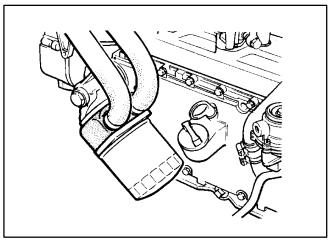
OIL COOLER (TURBOCHARGED)
